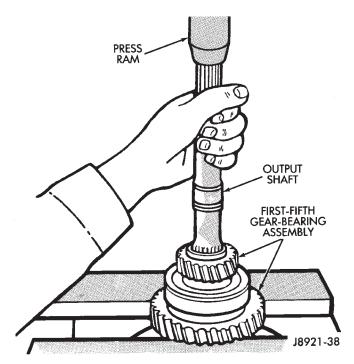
Remove Fifth Gear, First Gear Bearing, And Thrust Washer
